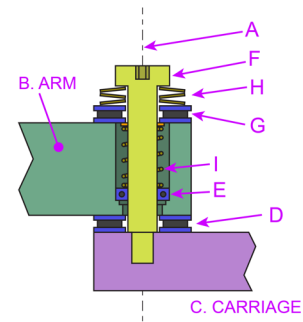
Fab Unit's shoulder joint rotates about axis A, absorbing radial and pitch moments between the arm (B) and carriage (C) by means of a thrust bearing (D) and a radial bearing (E) running on a shoulder screw (F). Preload is achieved through a top thrust bearing (G), disc washers (H), and a coil spring (I).
